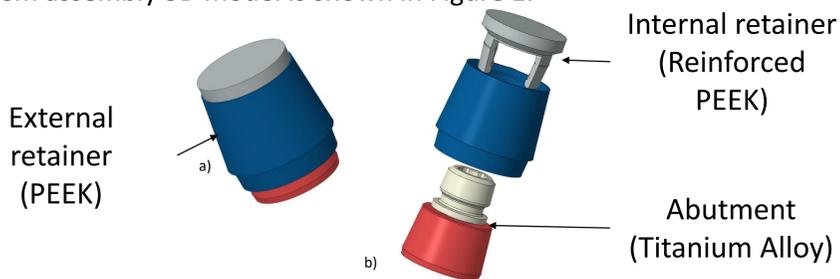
Developed retention system; a) Assembled model view; b) Exploded model view
